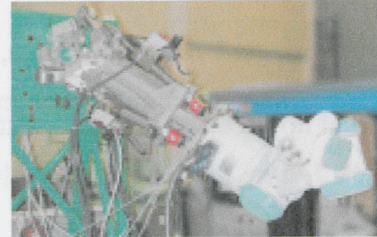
Dock welder manipulator consisting of four modules (left).
